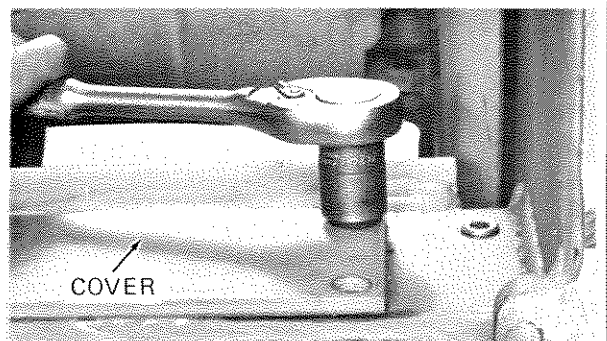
Removal Of Dry Brake And Automatic Brake
